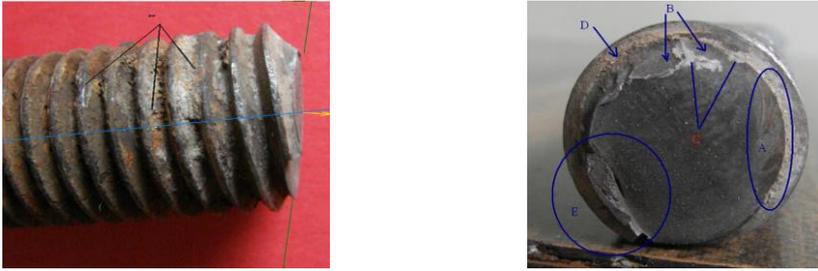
The threaded rod (a) and the fracture surface (b)
